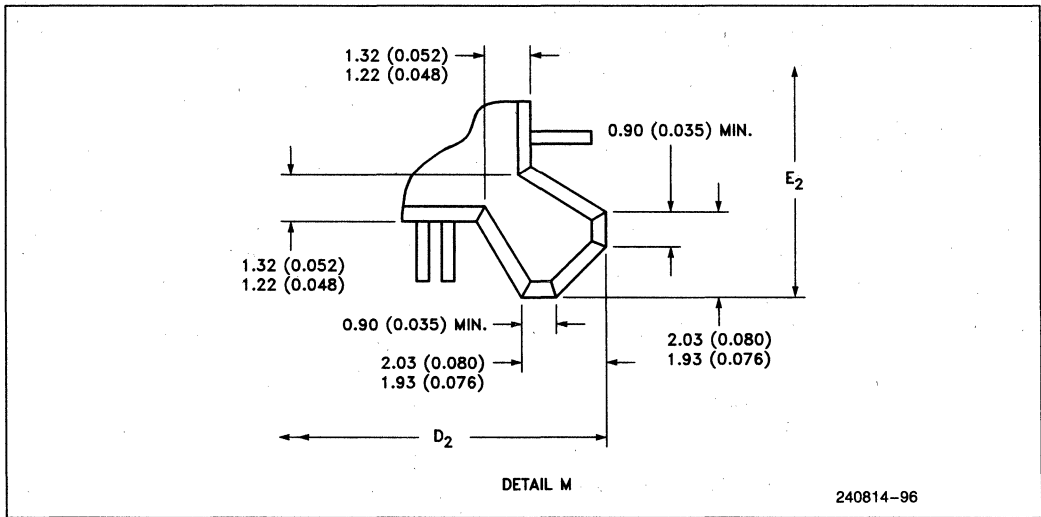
196-Lead PQFP Mechanical Package Detail—Protective Bumper
